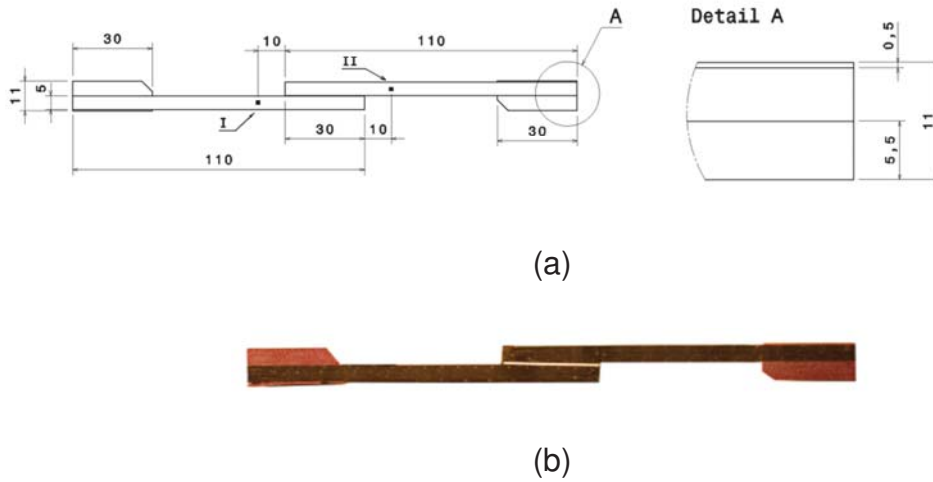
SLS specimen geometry: (a) sectional view of the specimen, (b) final SLS joint specimen.
